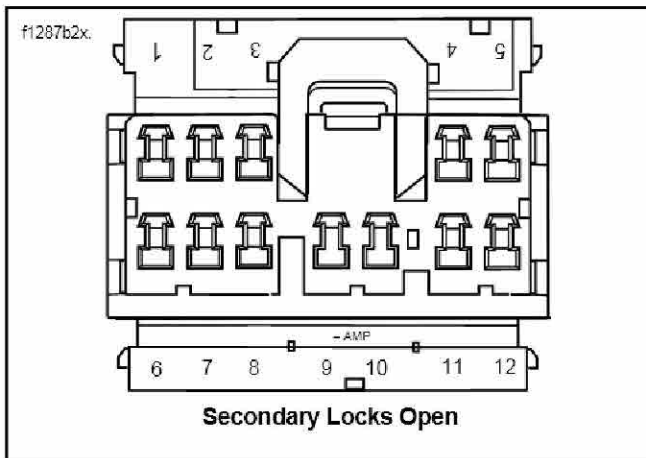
Terminal Numbers Stamped On Secondary Locks (12-place socket housing shown)
